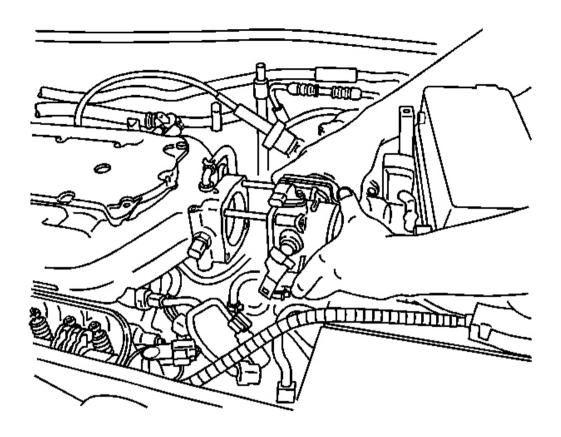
View Of Throttle Body Gasket Courtesy of GENERAL MOTORS CORP.
